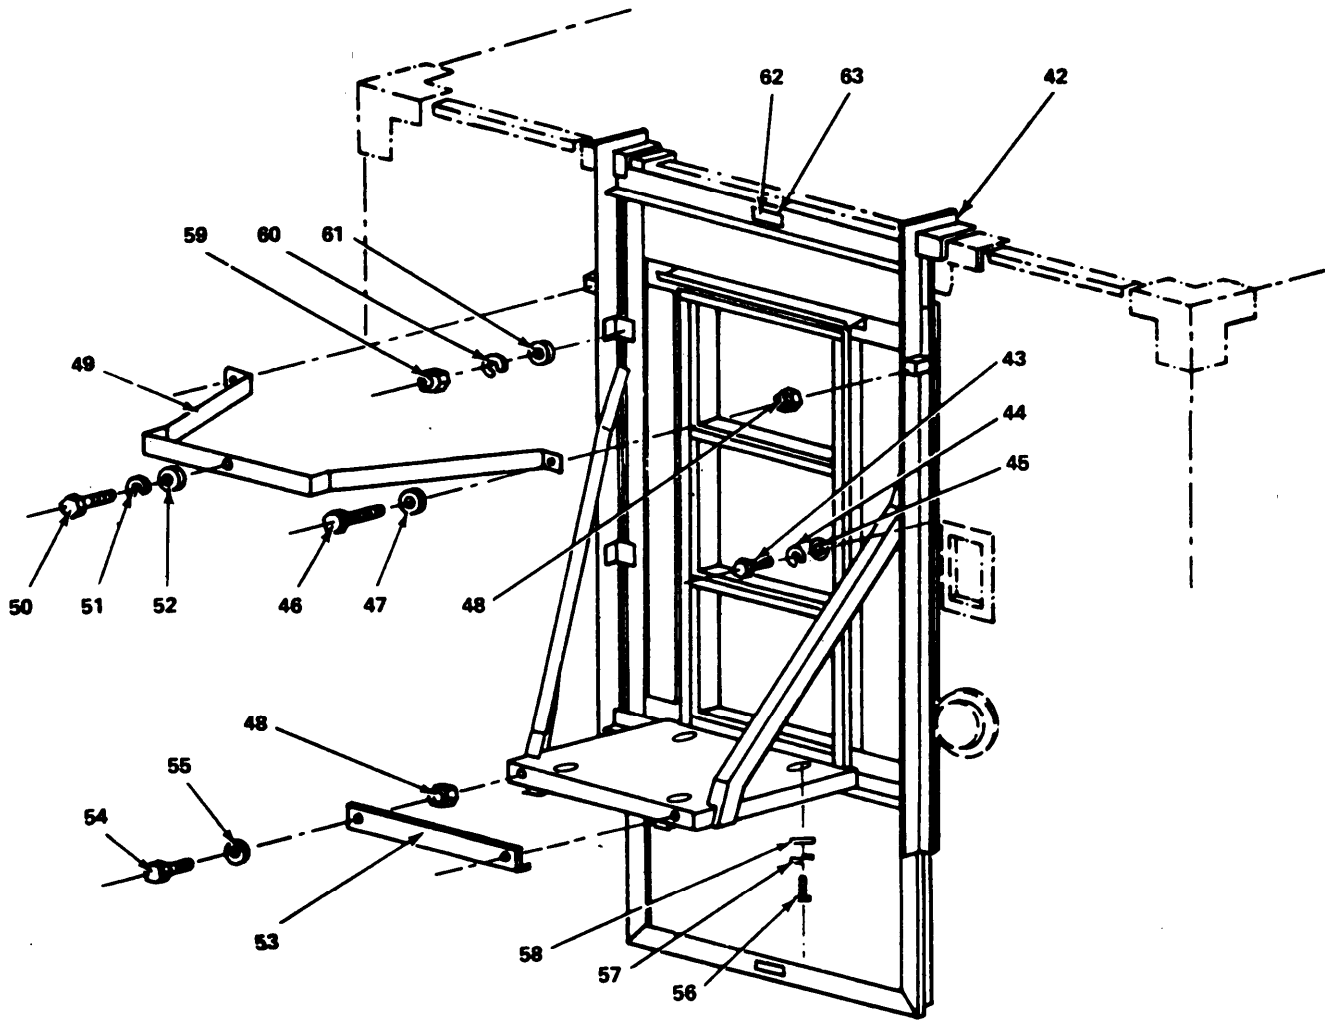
Air Conditioning Mounting Kit, S-389 Shelter (Sheet 2 of 3)
